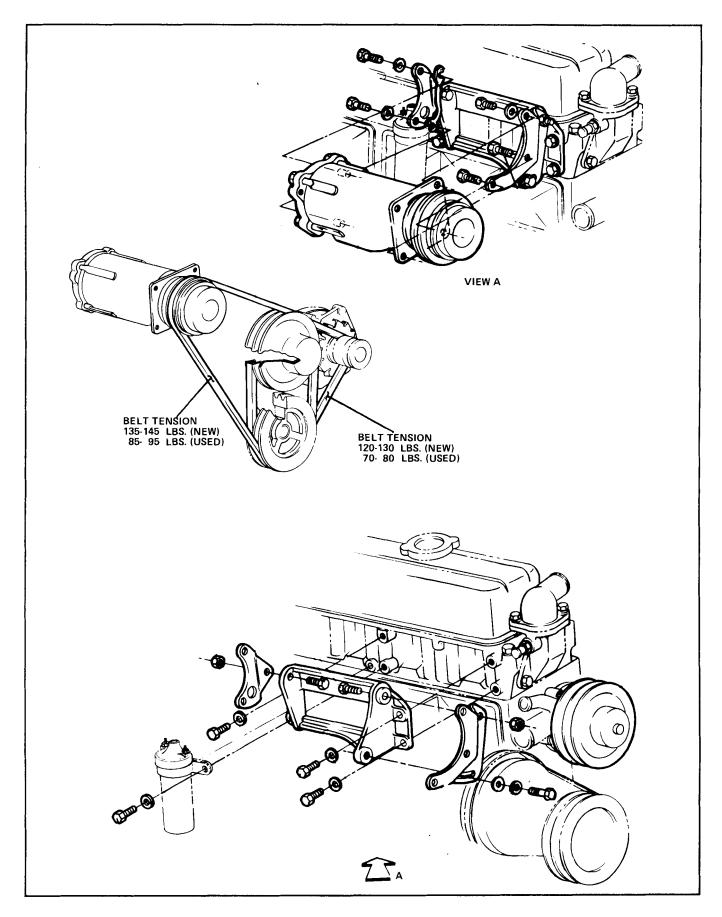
A-32 Accessory Drive - Air Conditioning (L-6)
